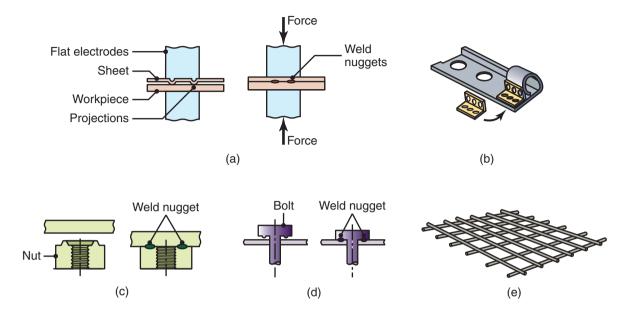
(a) Schematic illustration of resistance projection welding. (b) A welded bracket. (c) and (d) Projection welding of nuts or threaded bosses and studs. (e) Resistance-projection-welded grills.
